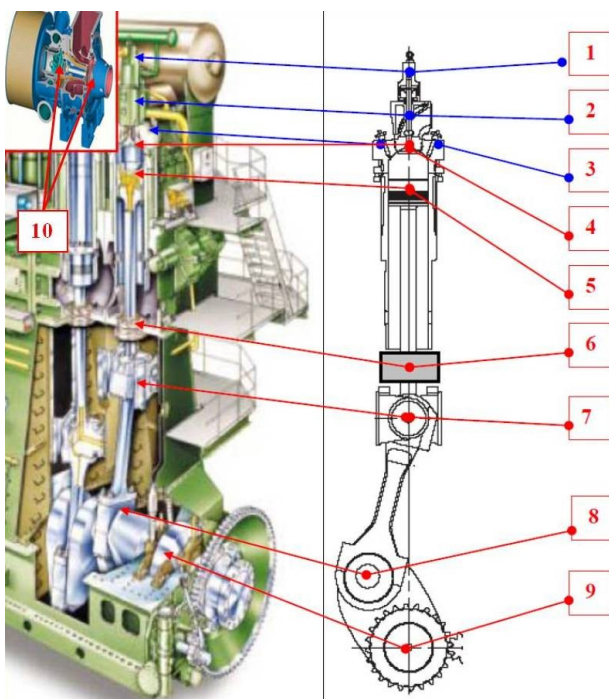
Scheme for the selected elements of tribological systems of two-stroke crosshead engine [1]; 1 – hydraulic and pneumatic system for fume exhaust driver valve, 2 – guide for rod of valve head, 3 – injection valve, 4 – valve spindle – valve seat, 5 – bushing – piston, 6 – stuffing-box for piston rod, 7 – crosshead bearing, 8 – crank-bearing, 9 – main bearing of crankshaft
